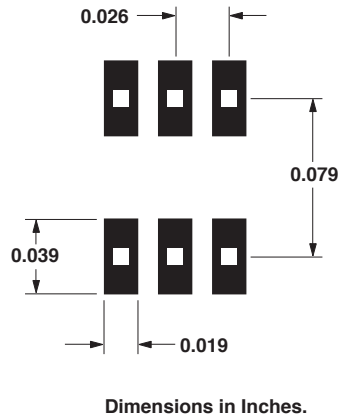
Recommended PCB Pad Layout for Avago's SC70 6L/SOT-363 Products.
